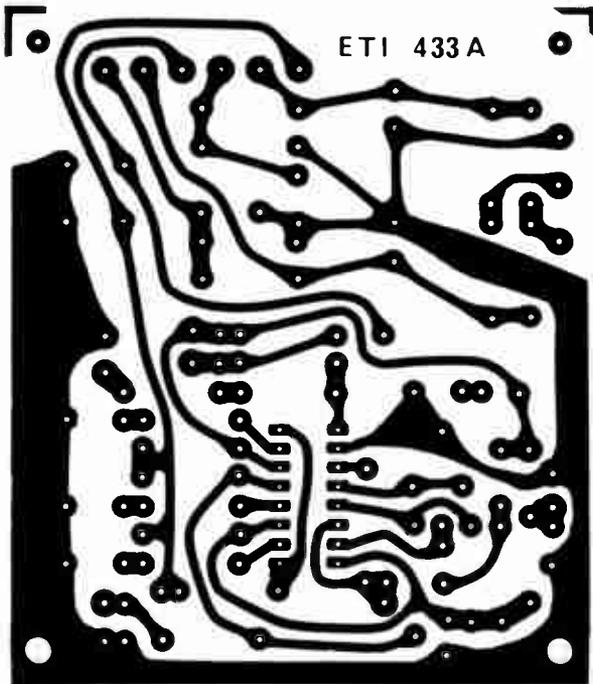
Printed-circuit layout for the two-way board. Full size 77 x 90 mm.
